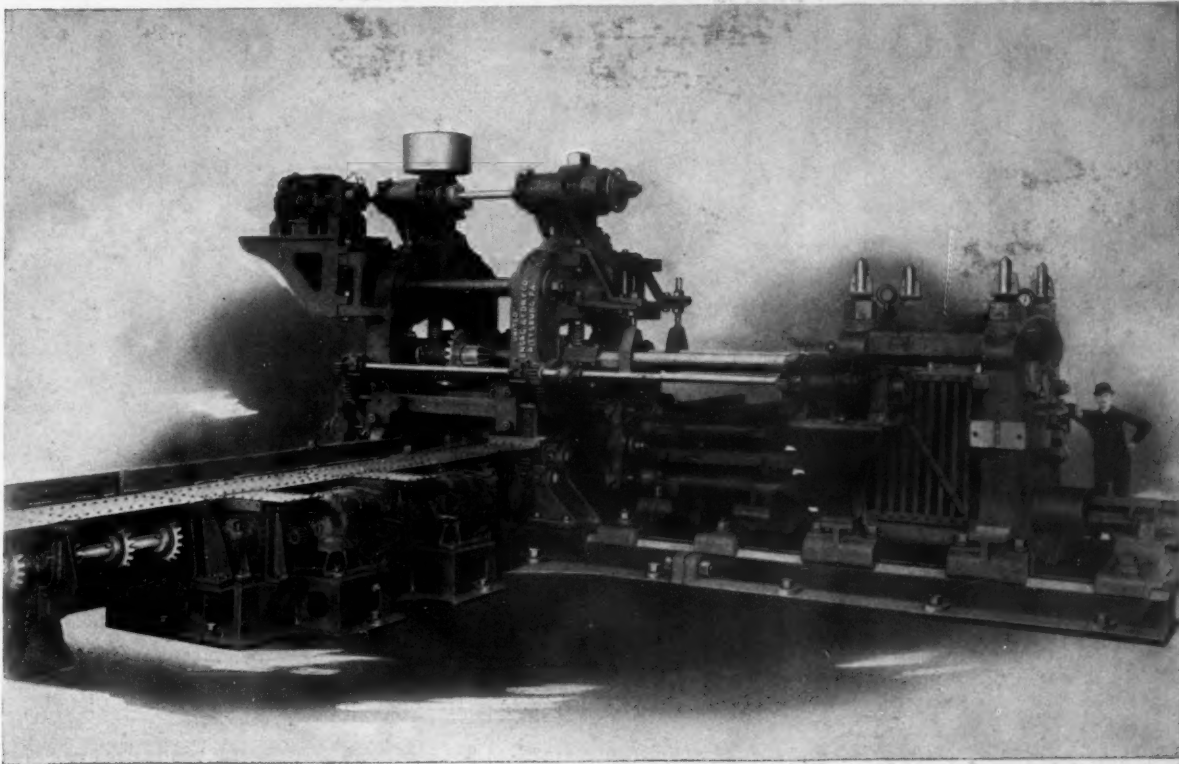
A 30-INCH UNIVERSAL PLATE MILL
